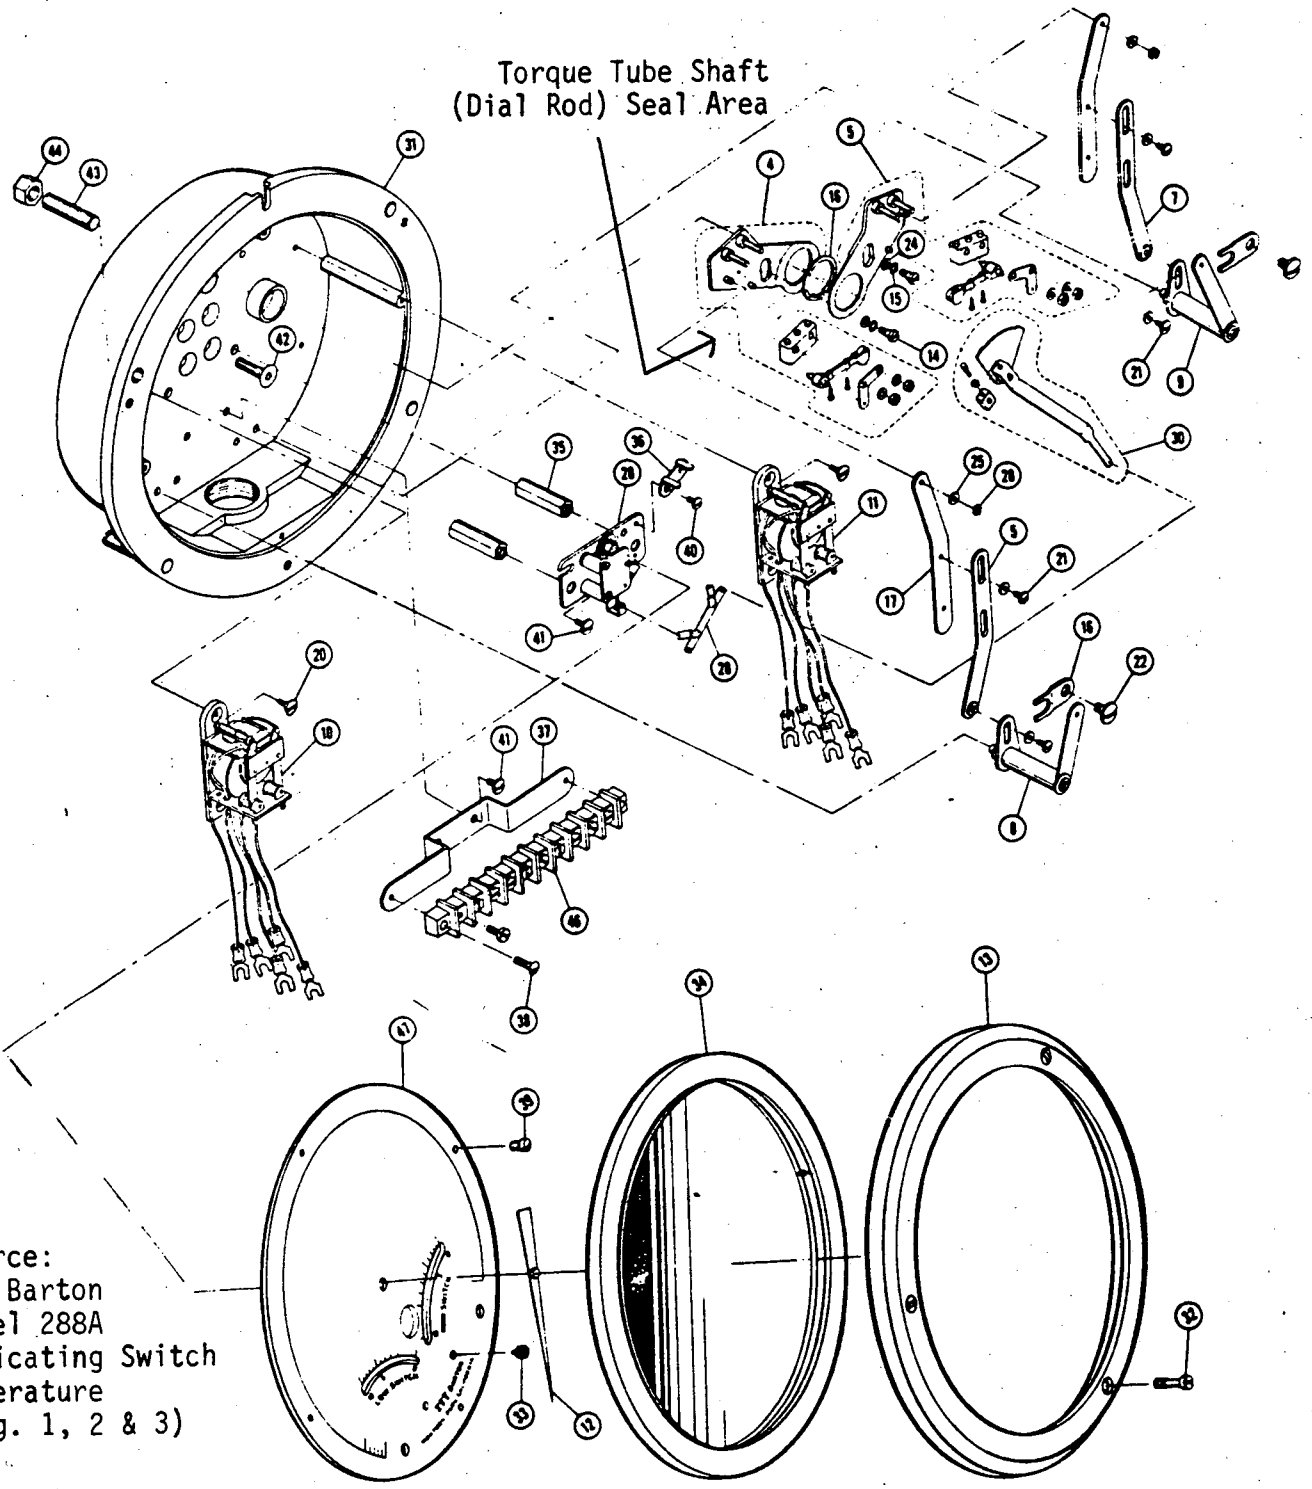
ITT Barton Model 288A Indicating Switch - Exploded View
